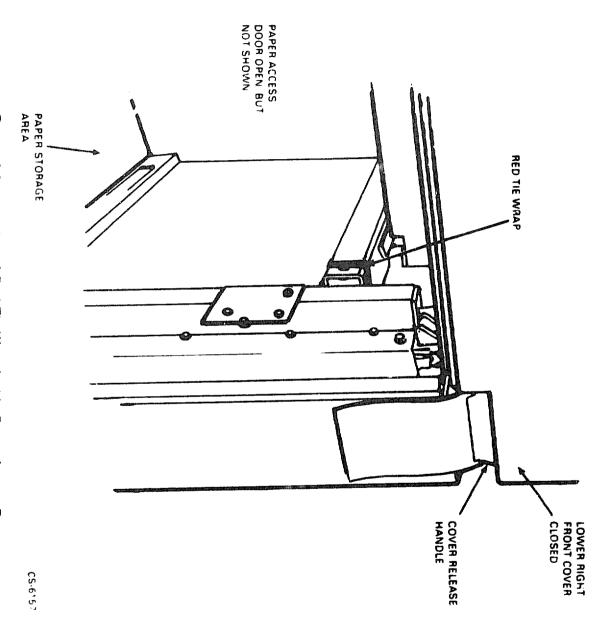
Location of Red Tie Wrap Inside Paper Access Door
